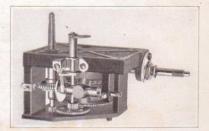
The motor rests in the phonograph attached to the motor board in this fashion.
